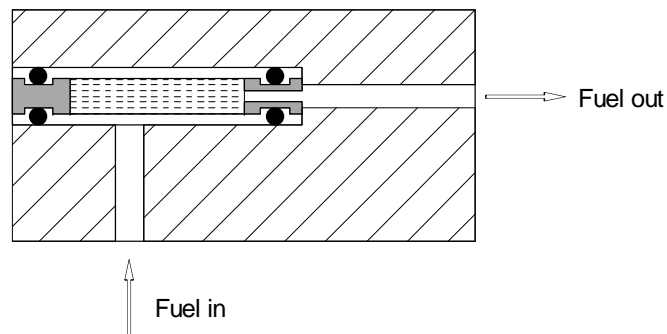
Schematic of Fixture for Torque Motor Filter Screen Tests
